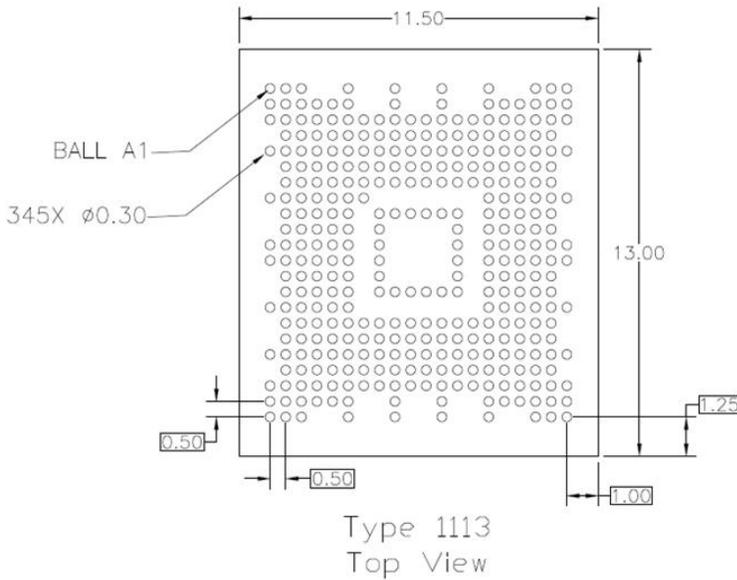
Recommended Land Pattern for M.2 Type 1113 BGA (Top View)
